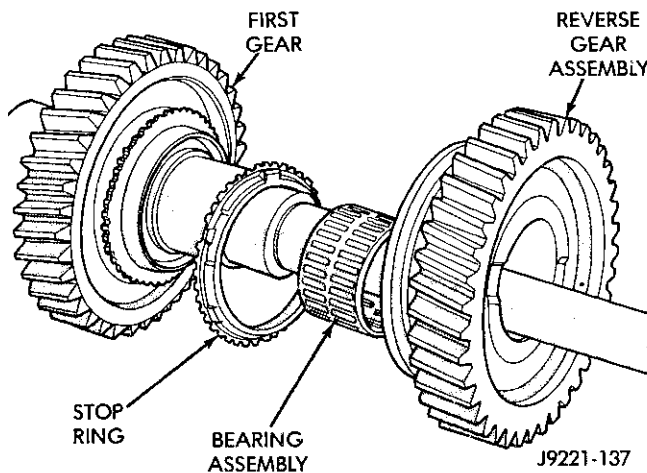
Reverse Gear, Bearing And Stop Ring Removal
